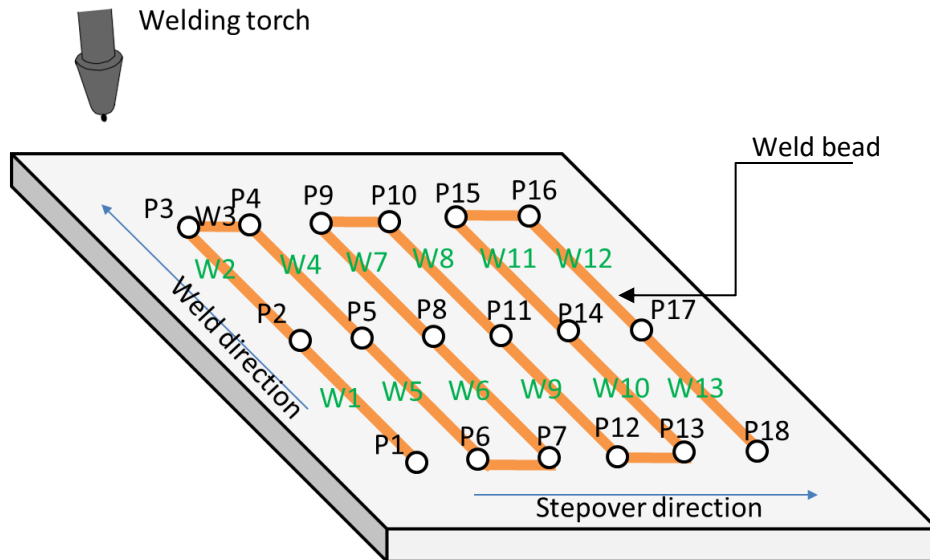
Schematic representation of weld path for multi-bead deposition of one layer.
